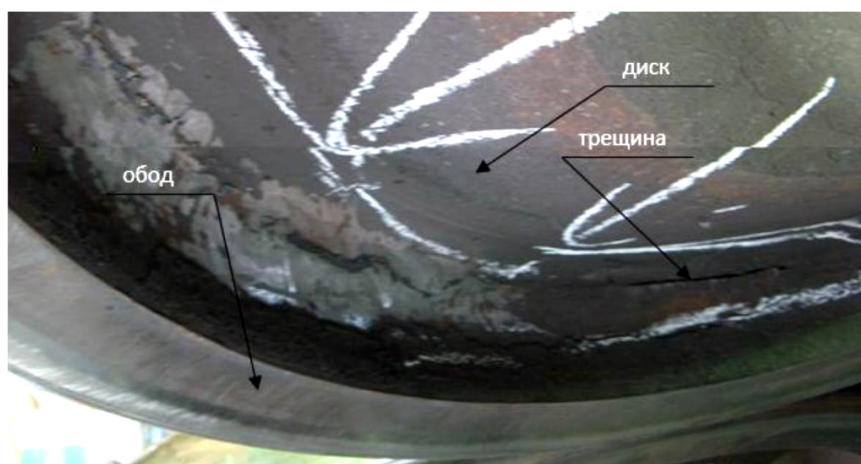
Fatigue cracks in the rim zone of the wheel
